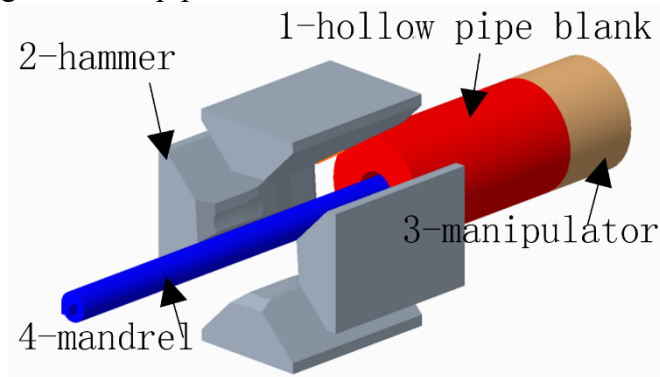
Numerical simulation CAD model of four hammer head radial forging hollow pipe blank with mandrel.
